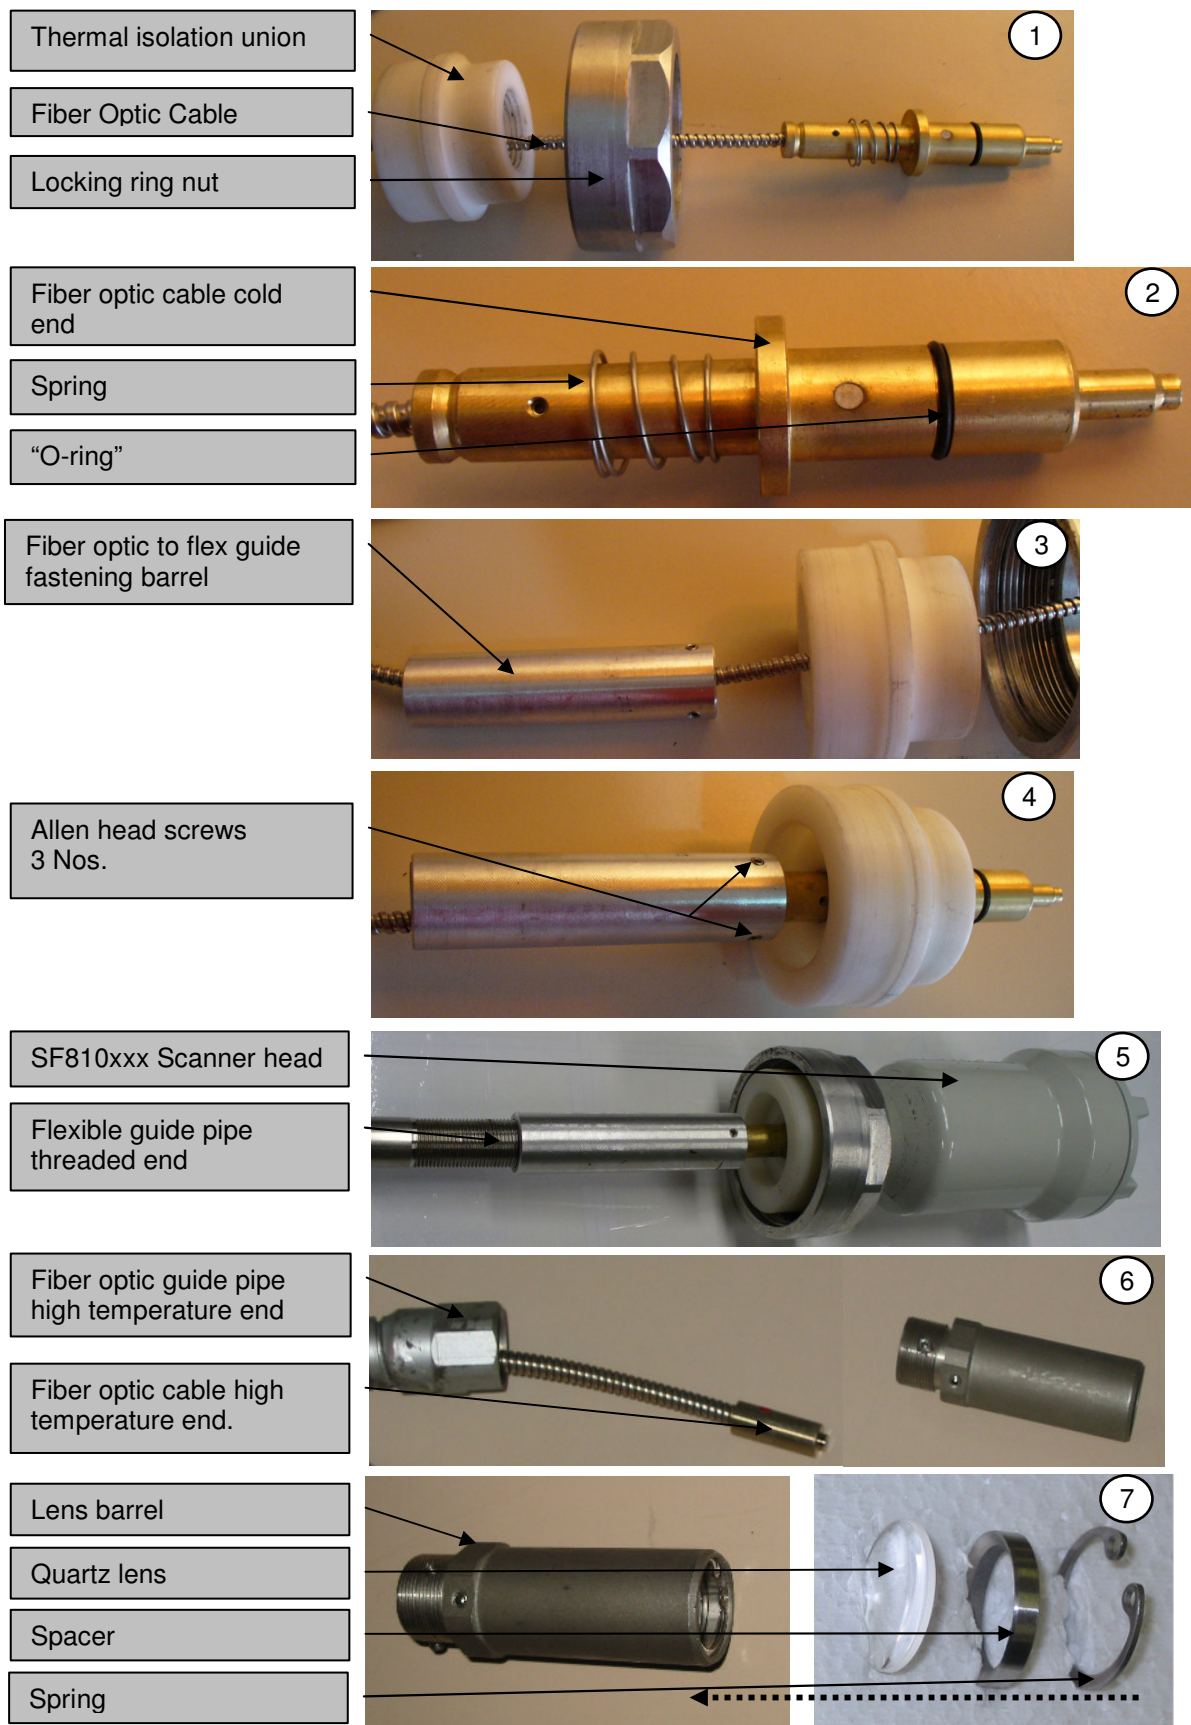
Fiber Optic Cable Assembling and Disassembling
